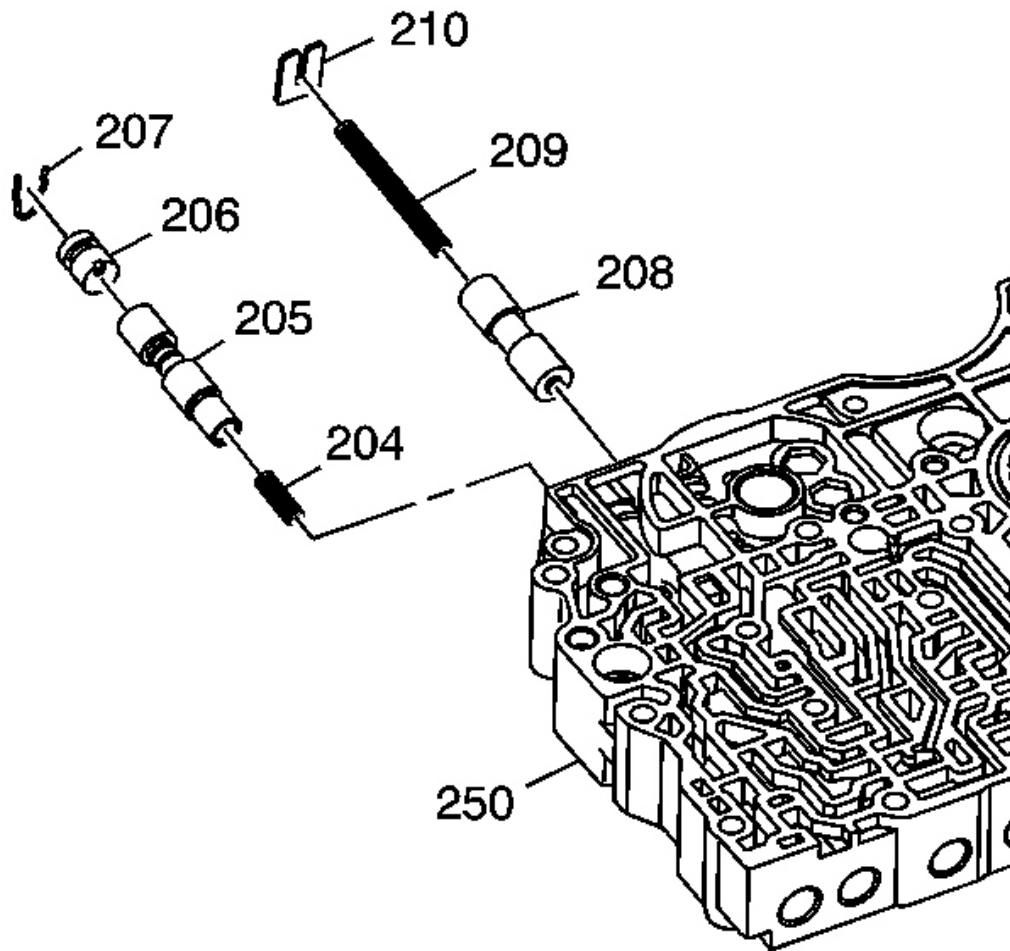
Main Control Valve Body Assembly, Plugs & Clips Removed
